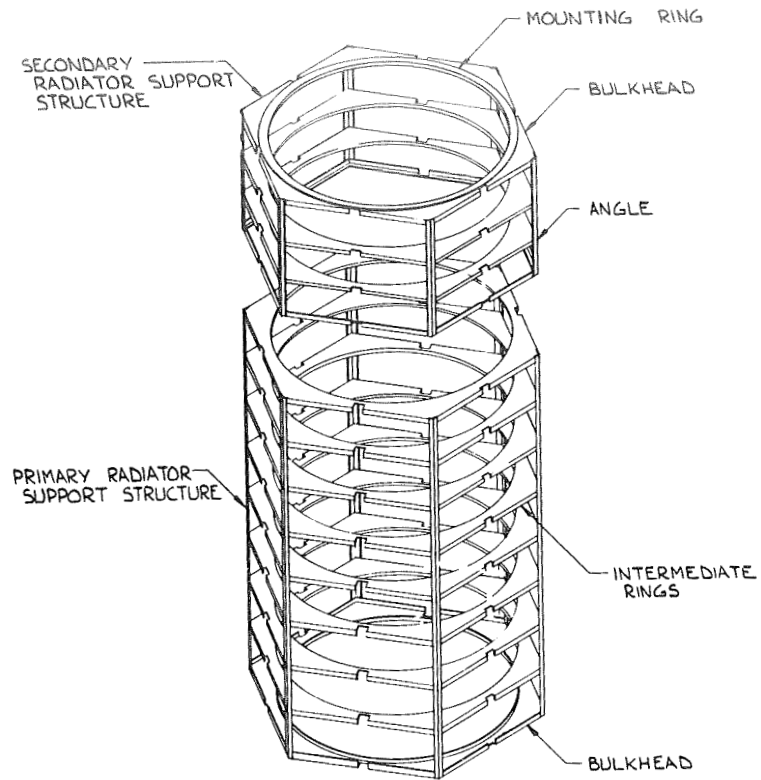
Vapor Chamber Fin Radiator Assembly Sequence Step 7
